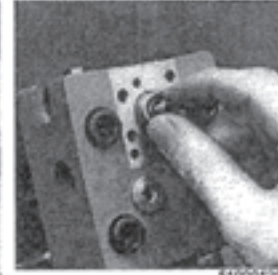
Install HC Control Start Adjuster Spring Seat
